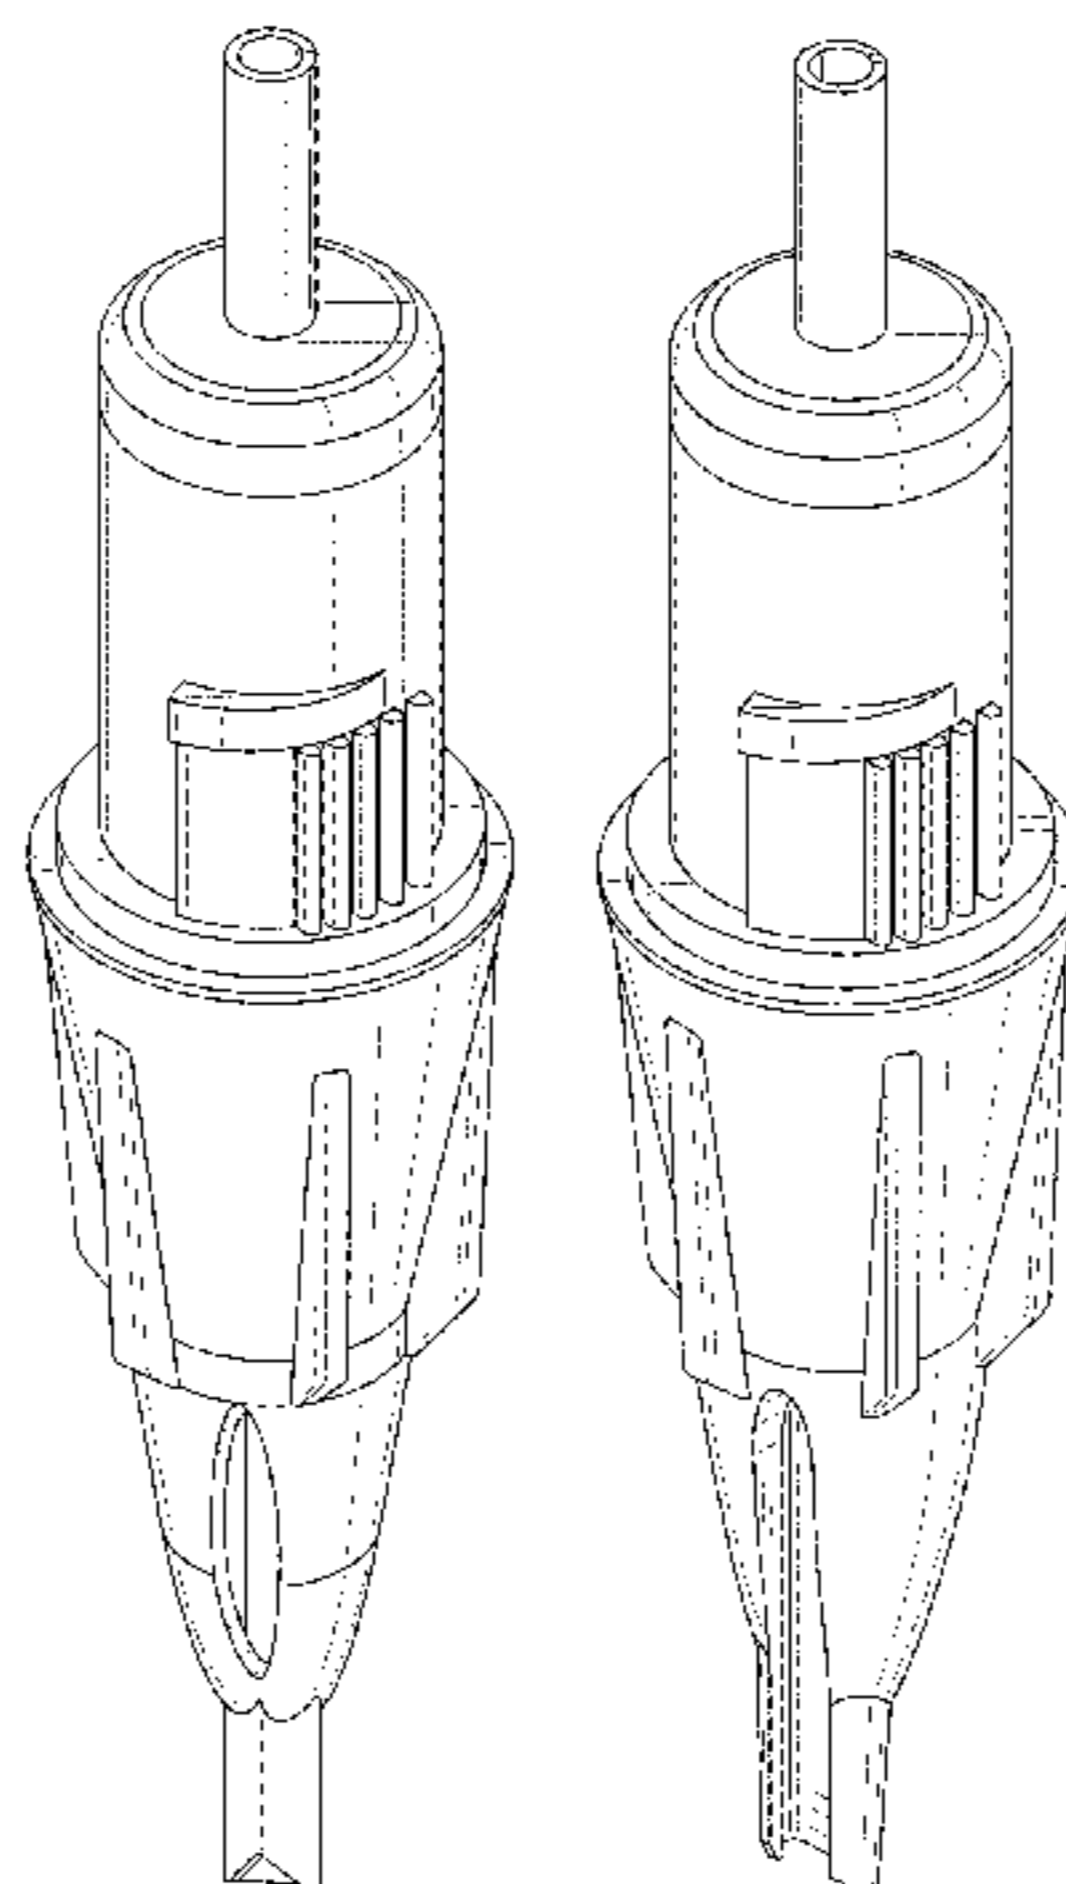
is a side view of the tattoo needle assembly of FIG. 15.
